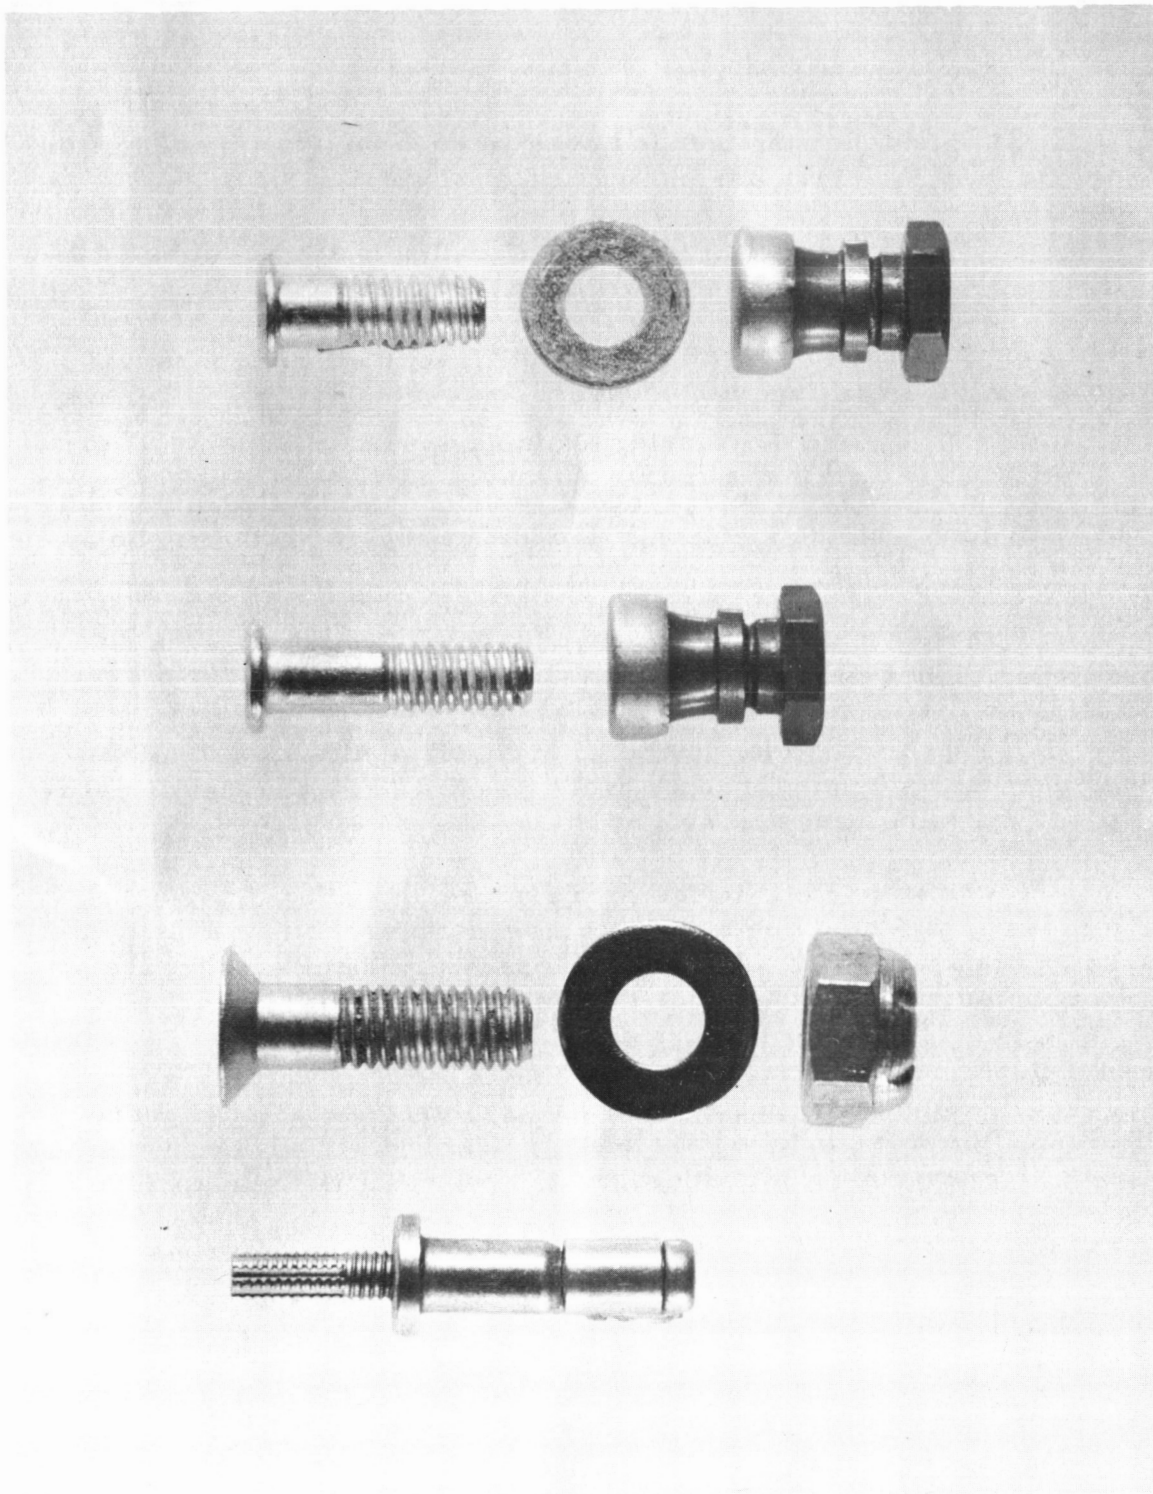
BLIND BOLT, FLAT HEAD BOLT WITH
